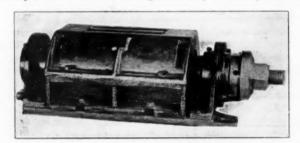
Woodworking Motor-Mandrel Unit, 5 Hp., 3600 R.p.m., with Bearings Separate from Main Motor Housing
